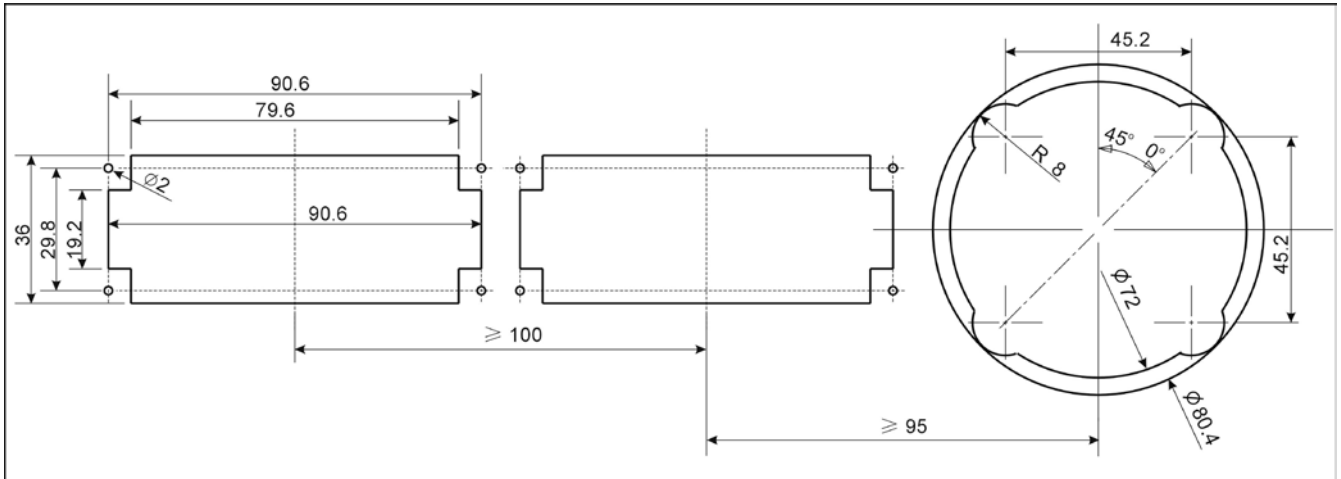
Positioning and assembly installation diagram of several HCS-48U6 series congress units (unit: mm)
